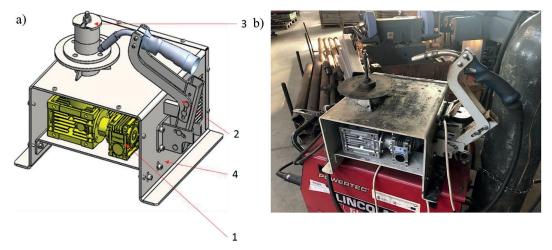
Special welding turntable for welding of disc harrow sleeves using MIG/MAG method: a) - design, b) - accomplished project
